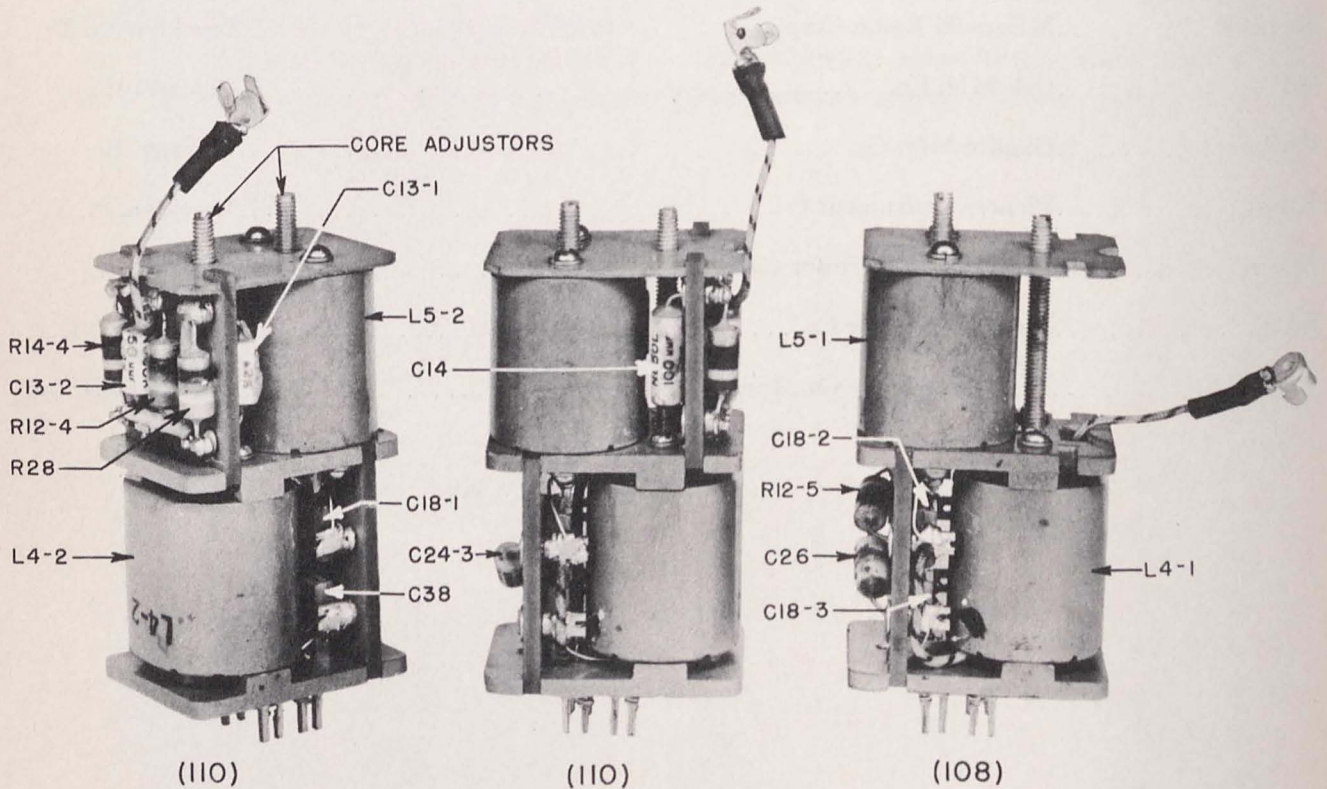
I.F. TRANSFORMER ASSEMBLIES (110 AND 108)
